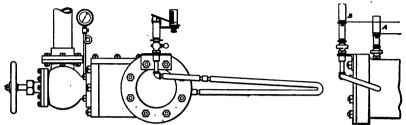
Method of Attaching Indicator Piping to Engine Cylinder
